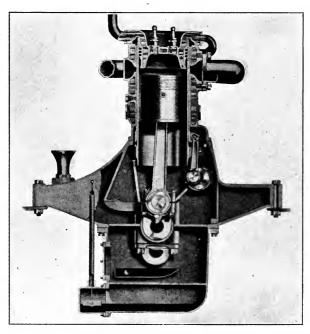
Columbia Knight Motor, Cross-Section View.
